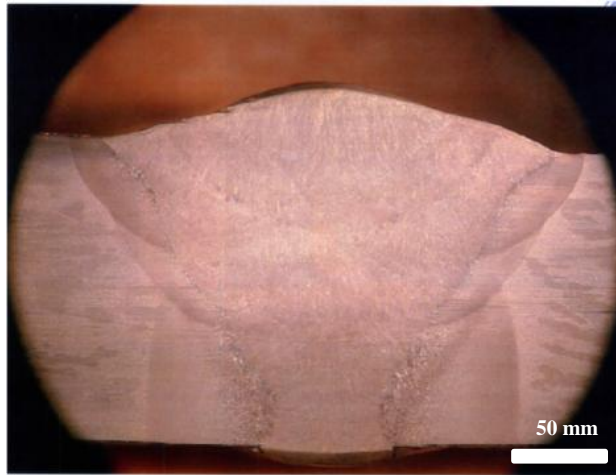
Macroscopic examination of HY 100 welded steel specimen.
